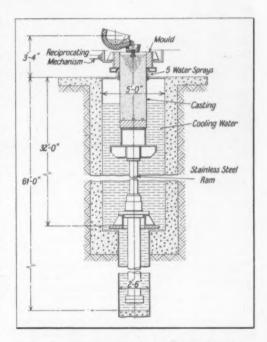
Cross-sectional View of the Ladle, Mould, and Cooling Pit of the Continuous-casting Plant for Copper Slabs which is Installed at the Works of the American Smelting & Refining, Co.
